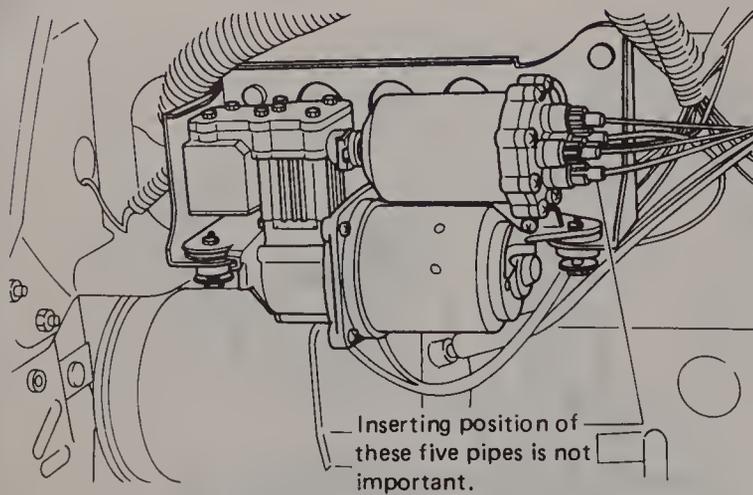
Air suspension system compressor/dryer assembly (Sec 13)
